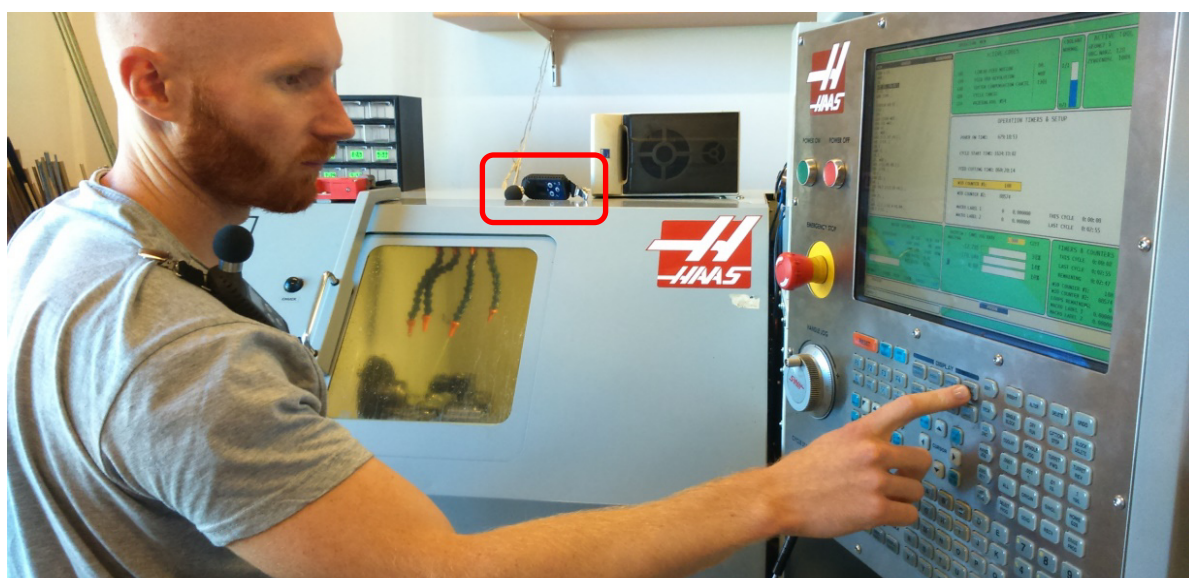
Worker operating CNC machine, left shoulder PSEM detached and positioned on CNC chamber
